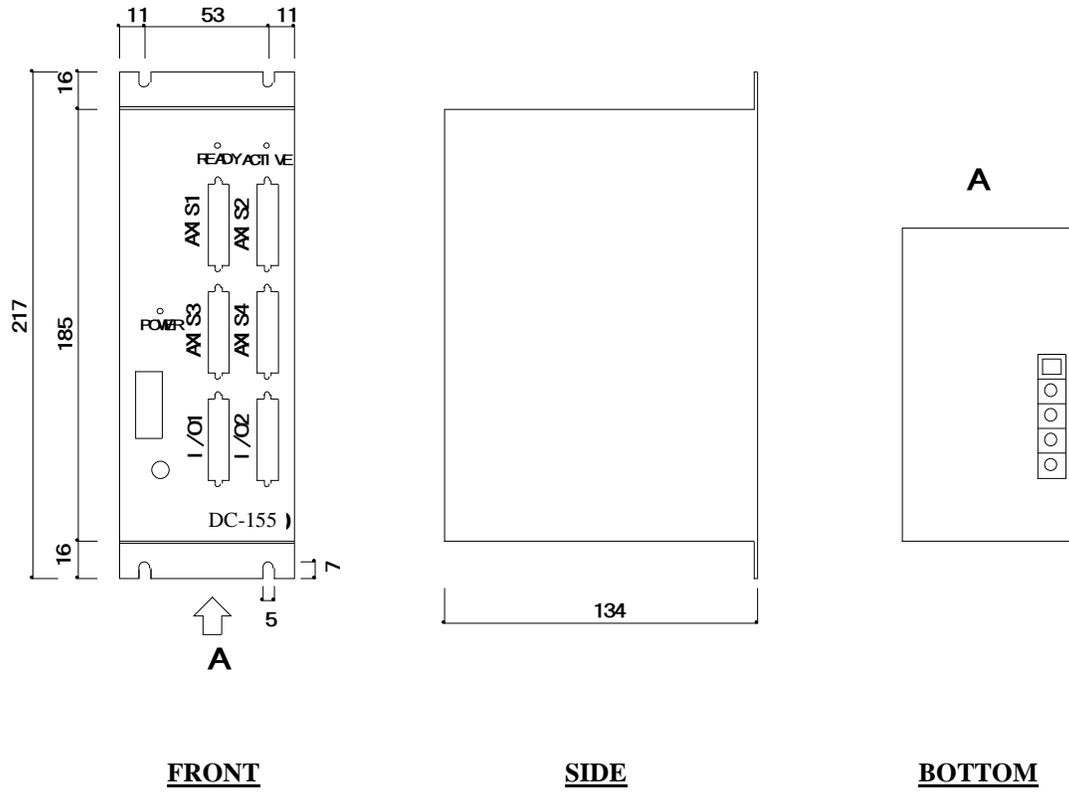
DC-155 Dimensions with Brackets in Millimeters
